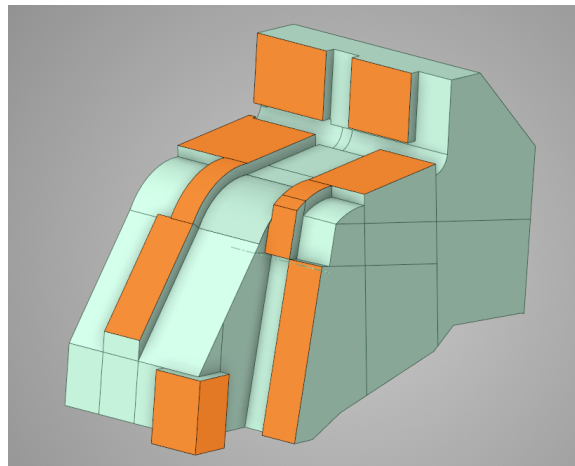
Design space for Trial 2 showing the addition of raised fixed support surfaces
